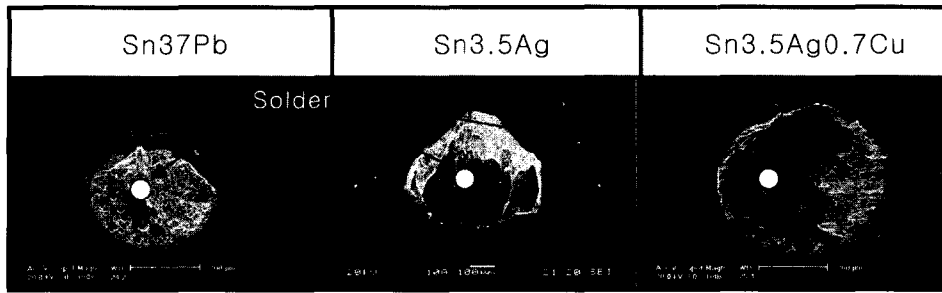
Fracture surface of solder ball bonded on thick-film UBM by plasma treatment after shear strength test.
